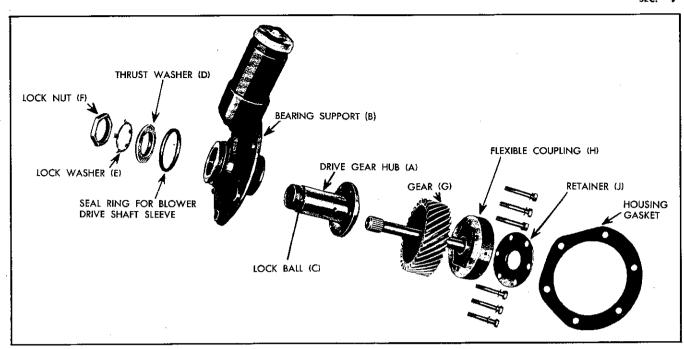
Details of Blower Drive Gear Assembly and Relative Location of Parts.
